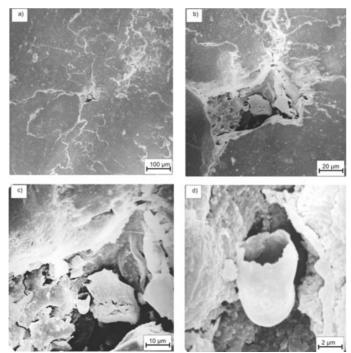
General view of the surface of a pitting breach after testing contact-fatigue strength of cast iron EN-GJSF roller burnished with the force P = 4000 N
